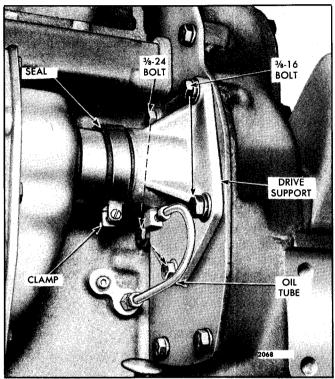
Blower Drive Support Mounting on 4-53 In-line Engine
